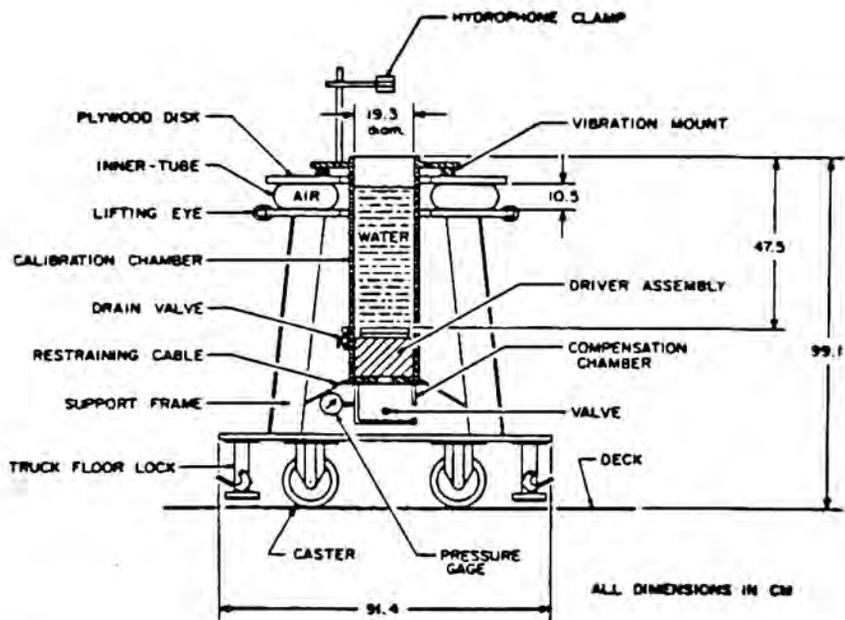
Sectional view of Type G40 shipboard calibrator (measurements in cm).
